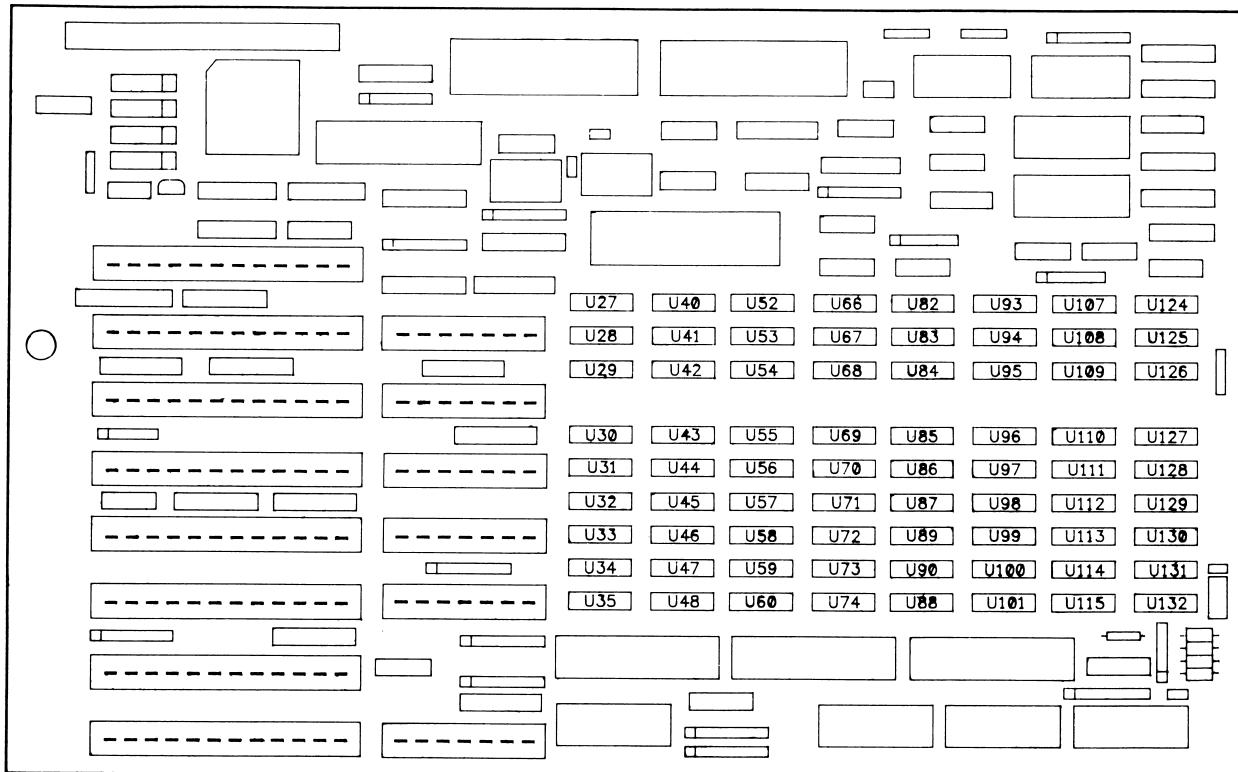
COMPAQ DESKPRO 286 System Board (Version 2 & 3) Memory Chip Location.
